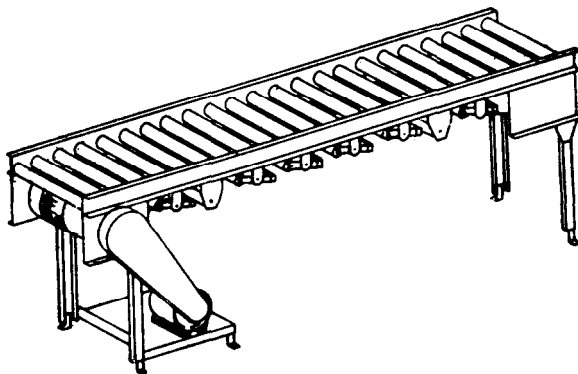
MINIMUM PRESSURE ACCUMULATING CONVEYOR
